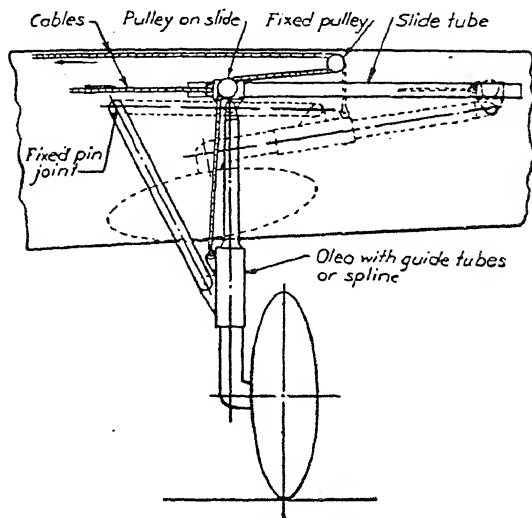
U.S. AIR CORPS (ENGINEERING DIVISION) RETRACTION GEAR
